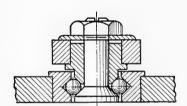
Arm joint of a pantograph machine, with center stud clamped without end play, stud head and bushing end forming the ball race.
